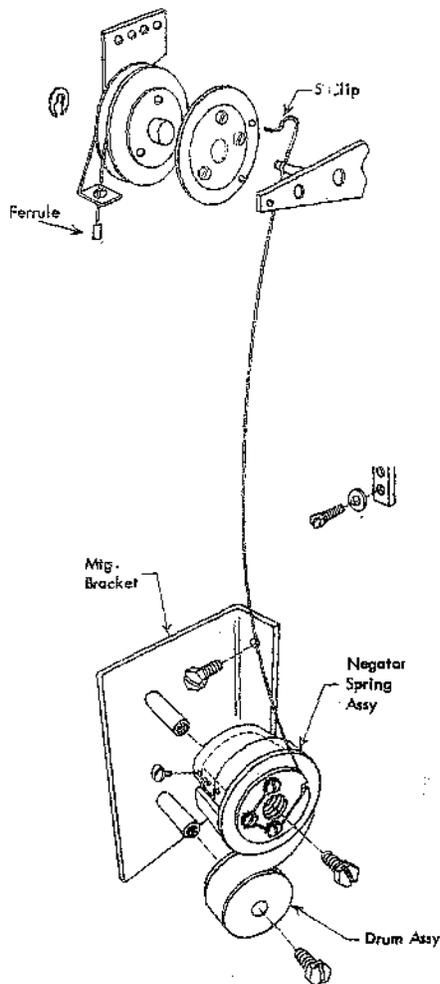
Sliding Glass Spring Drum Pulley Assembly
